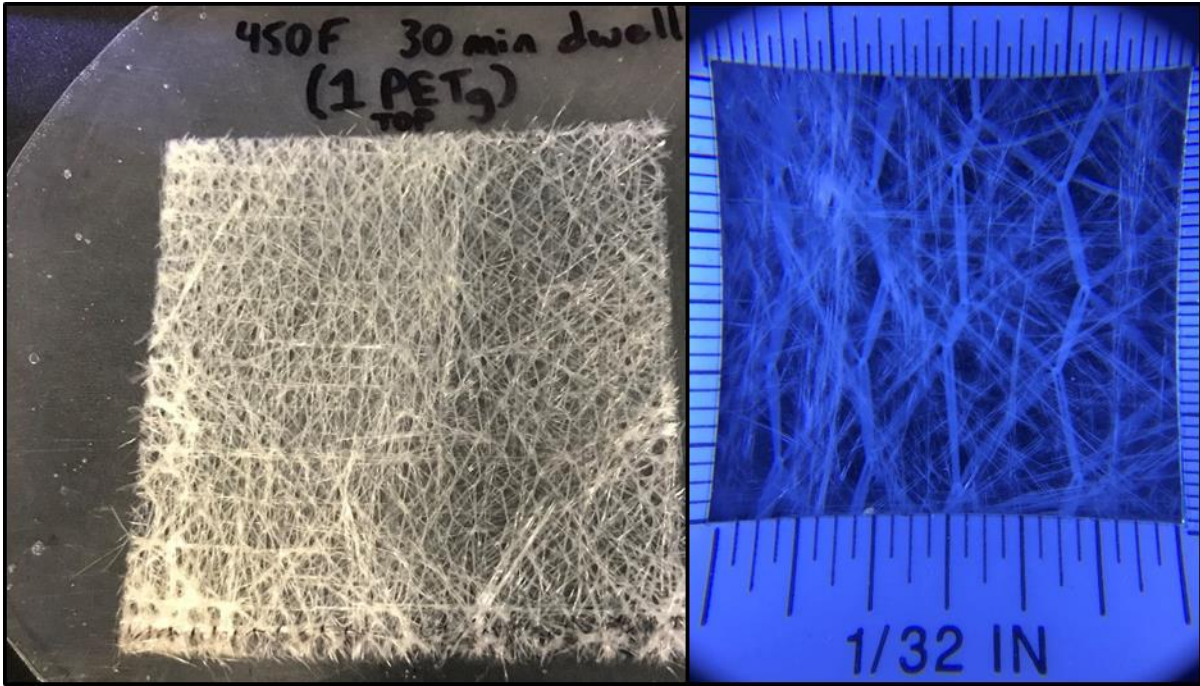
Trial CSM Sheet - 450°F / Constant 30 psi / 1 Resin Sheet / Active Cooling
